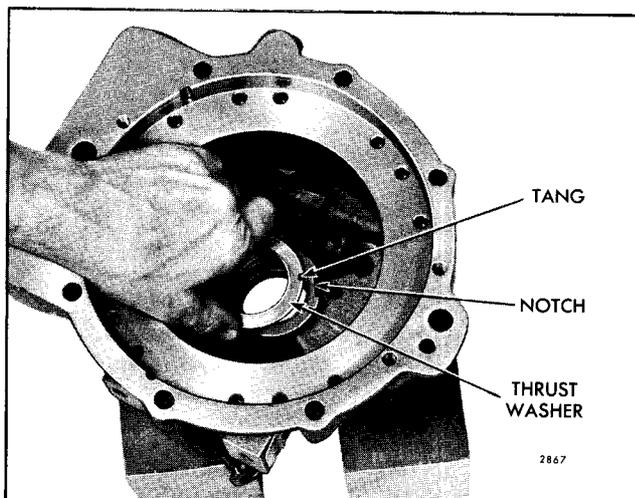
Installing Reduction Gear Input Shaft Thrust Washer in Gear Housing (1.5:1 and 2.1:1 Ratios)
